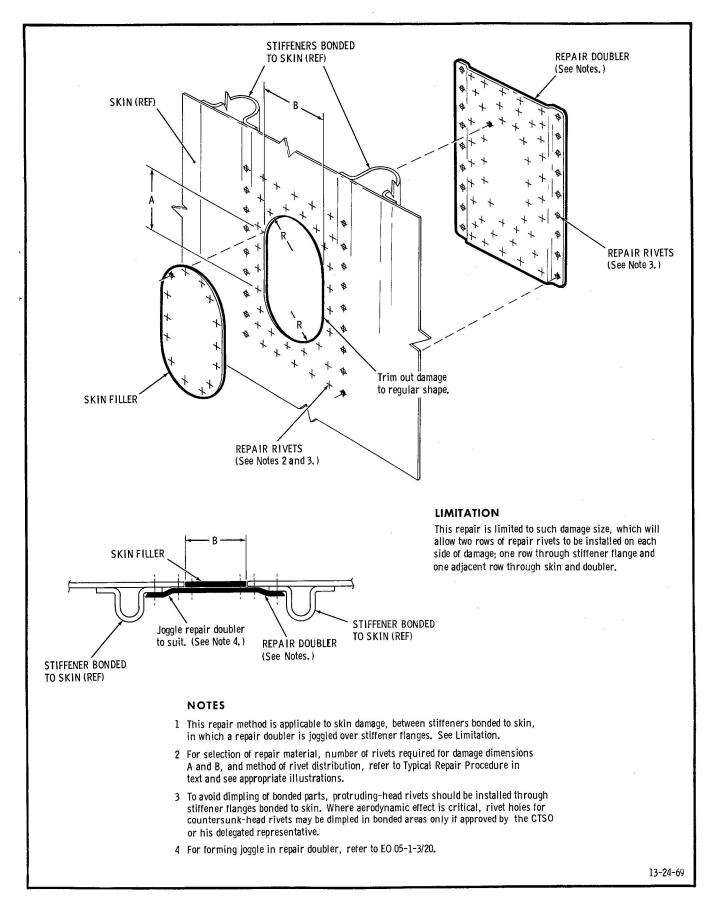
(Sheet 2 of 2) Skin Repair Methods - Repair Doubler Joggled over Substructure Flange
